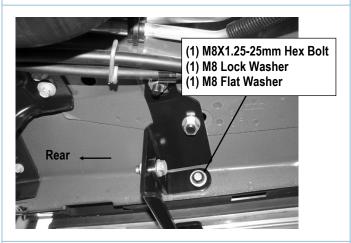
Mark & Drill A Hole On The Pinch Weld According To The Driver Rear Support Bracket Location
